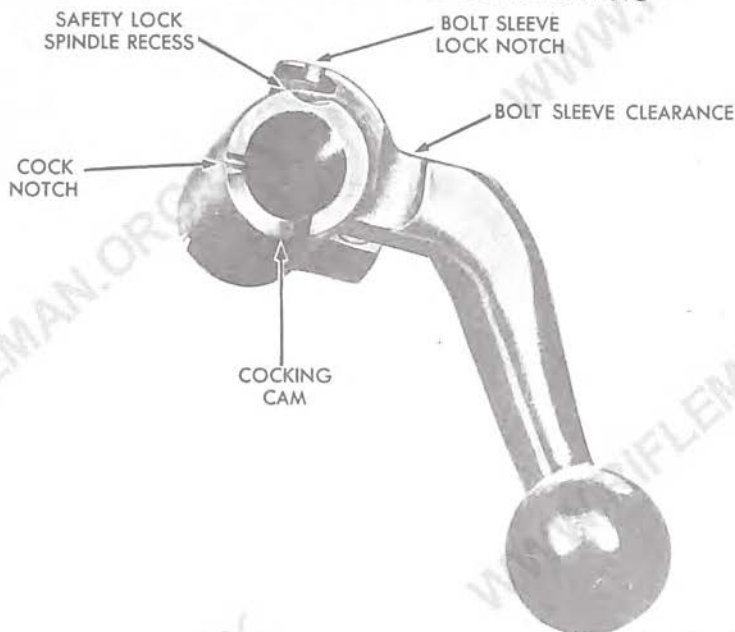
Bolt Head Assembly of U.S. Rifle, Cal. .22, M1
